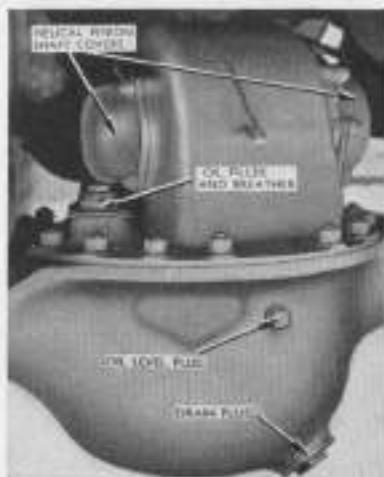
Rear Axle Oil Filler and Drain Plug.
